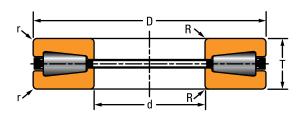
Type TTHD thrust tapered roller bearing assembly.
